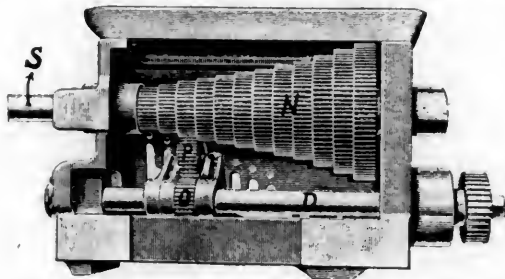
REAR VIEW OF GEAR-BOX, SHOWING GEARING.
